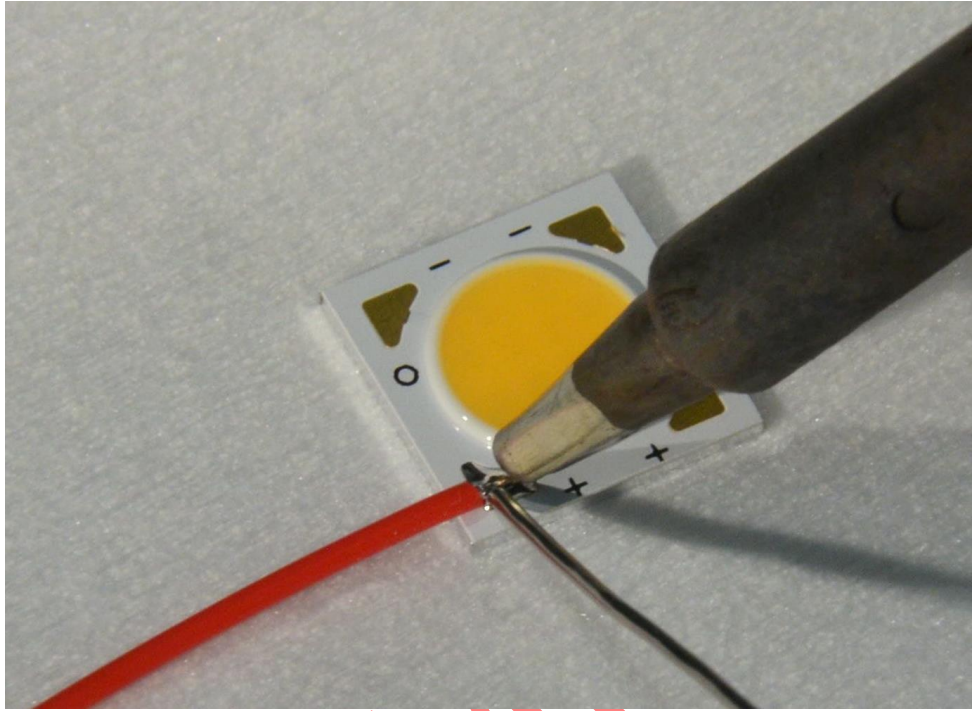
Soldering a pre-tinned wire to a pre-tinned solder pad
